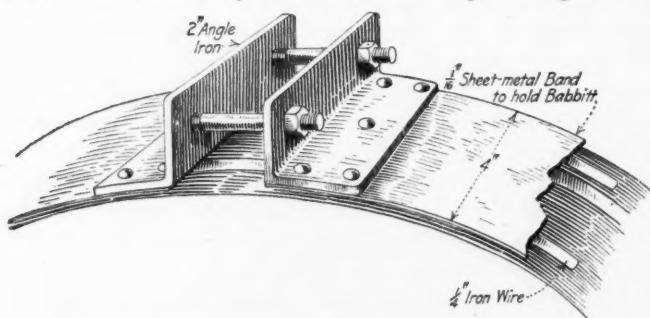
SHEET-IRON BAND FOR BABBITTING BULL-RING
